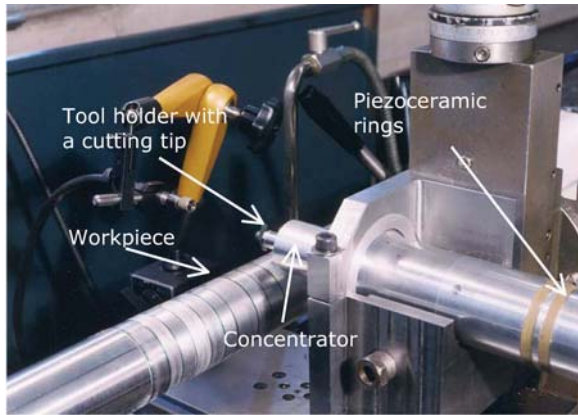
Experimental set-up of ultrasonically assisted machining system.
